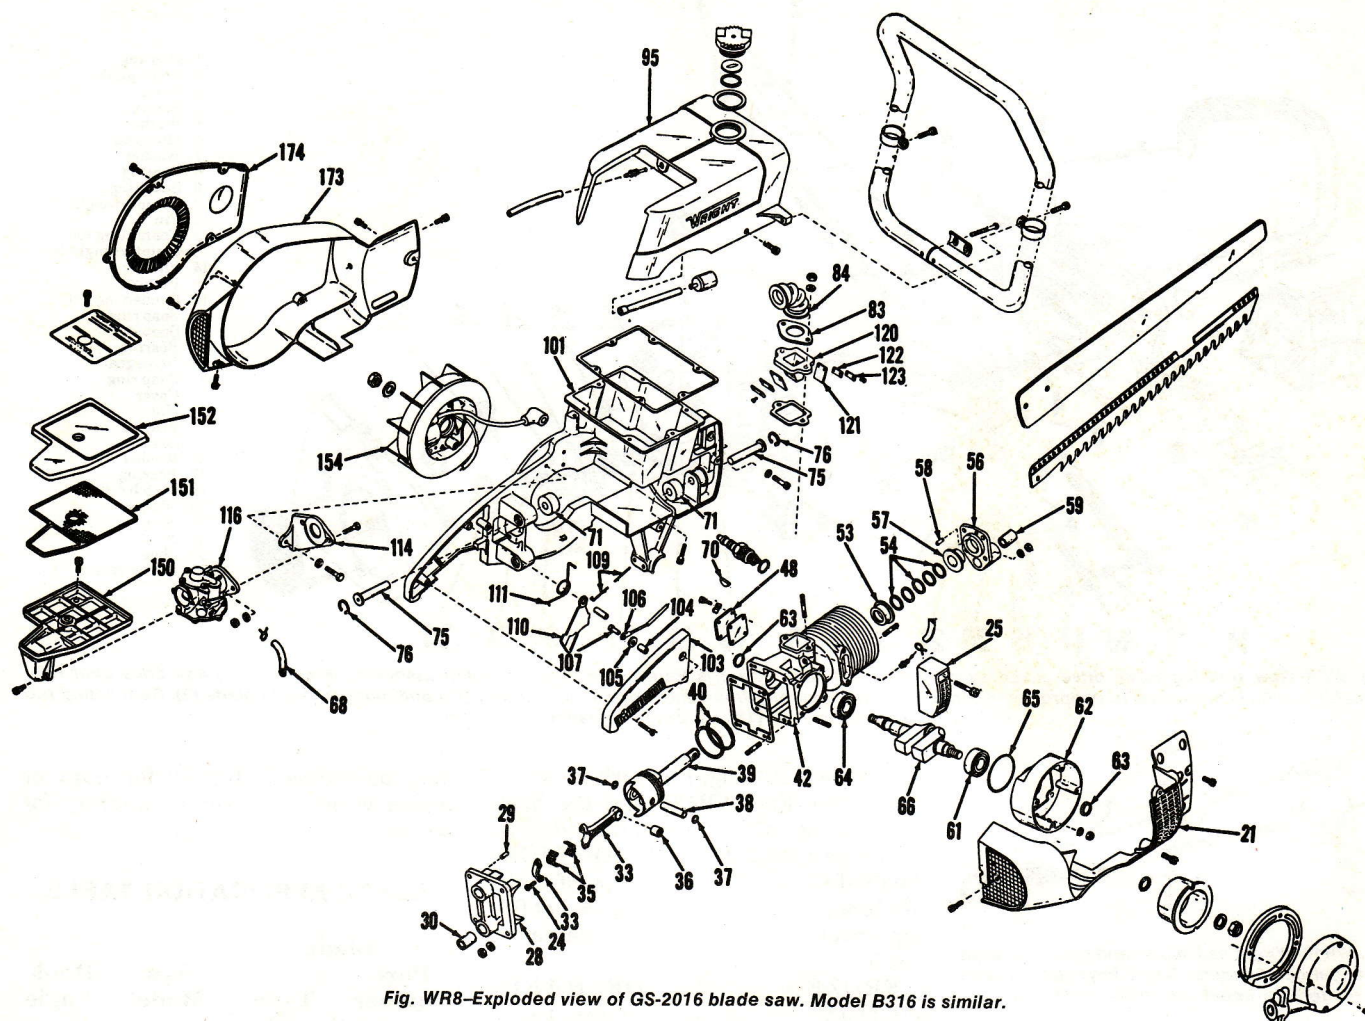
Exploded view of GS-2016 blade saw. Model B316 is similar.
